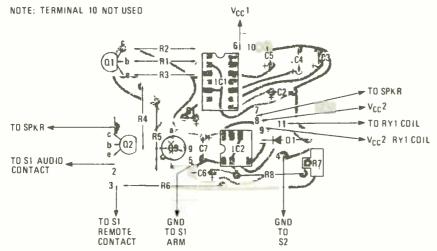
COMPONENT SIDE OF THE MAIN PC BOARD. The numbered solder pads correspond to similarly numbered terminal points on Fig. 2.
